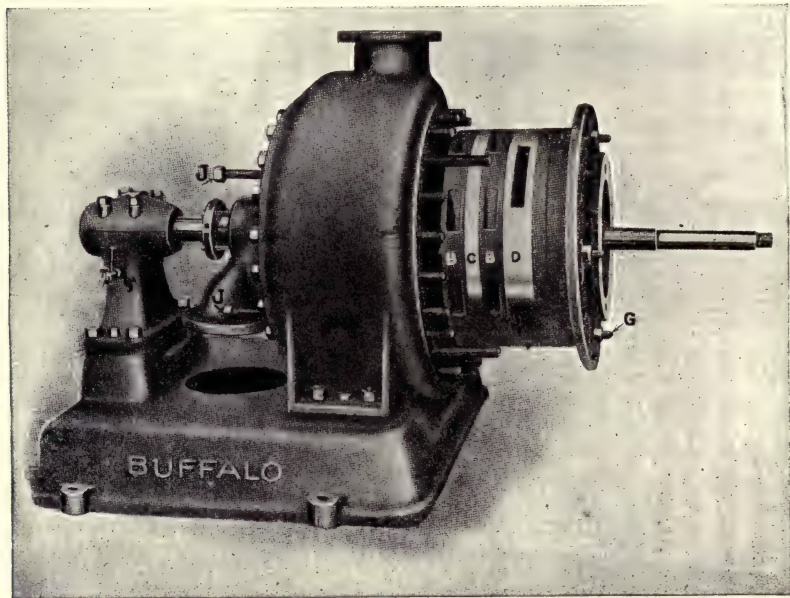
Method of Assembling Buffalo Multi-stage Pumps.
